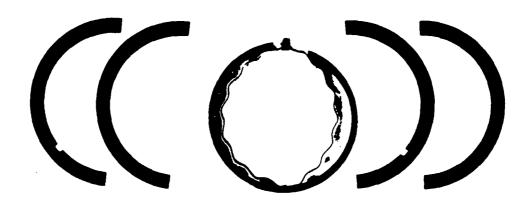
SHAMBAN S37905 PISTON RING ASSEMBLY
